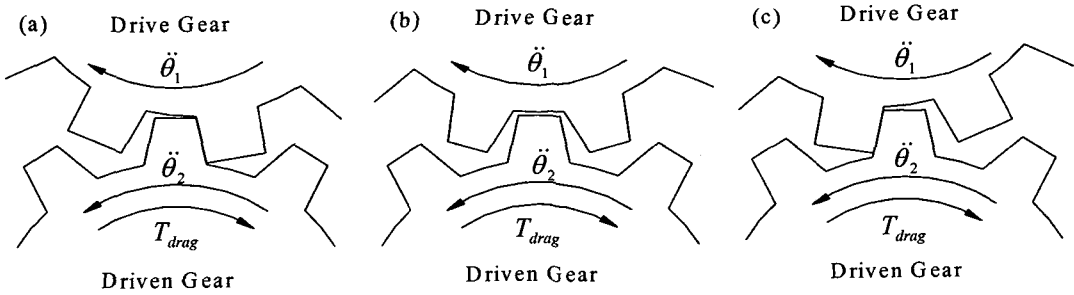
Meshing gears, (a) gears in contact on the driving side (b) gears separated (c) gears in contact on the driven side.
